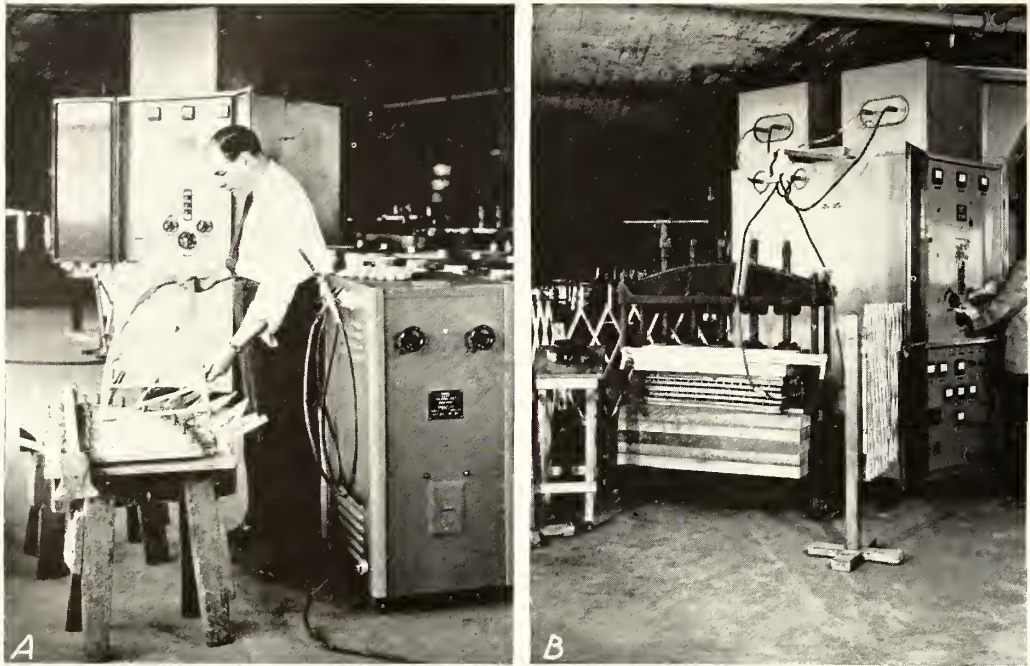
High-frequency heating of wing rib parts. *A*, Single piece after removal from clamp press; *B*, multiple pressing and heating of wing rib part using large generator.
